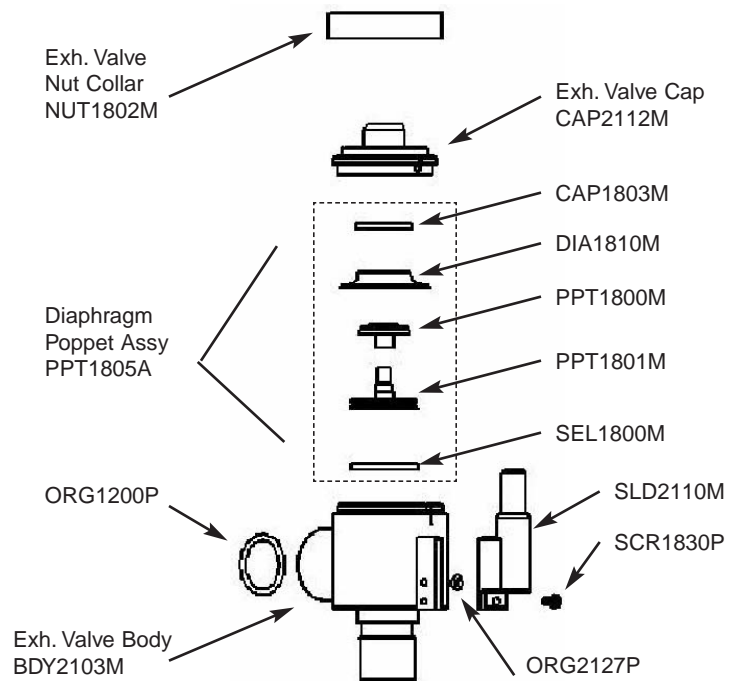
Diaphragm, Seal & O-Ring Replacement
